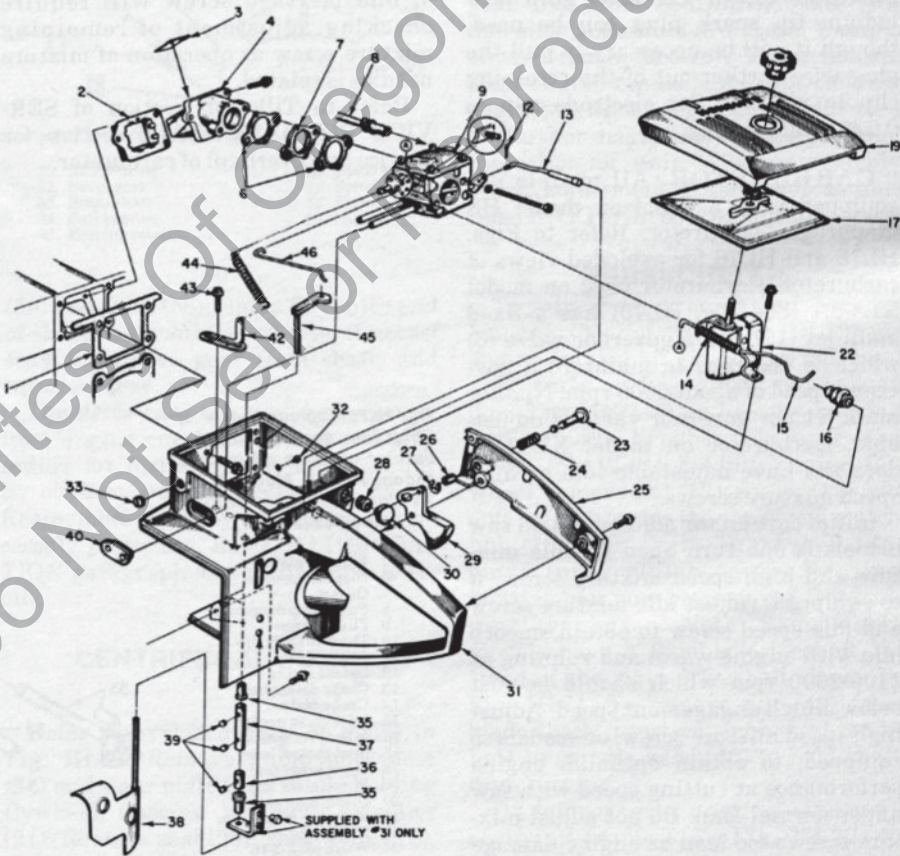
Exploded view of model XL-88 air box and handle assembly. Models XL-98, XLS2-1 and XLS2-1A are similar. Governed speed is adjusted by loosening screw (43) and moving slotted speed adjusting plate (42). Reed retainer (2) should be installed in engine intake port, then install reed seat (4) with reeds (3).
